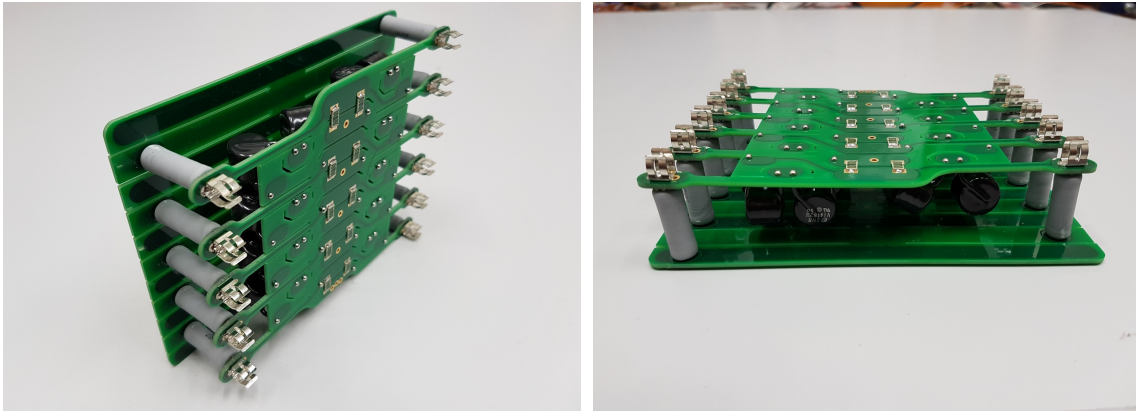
One of the resistor chain modules, which covers 9 unique field-shaping rings. The two PCBs can be seen, with the first housing the surface-mounted resistors and varistors, and the second acting as a field shaper. The fuse clips for connecting the module to the field-shaping rings are located on the flexible extensions to the first PCB.
